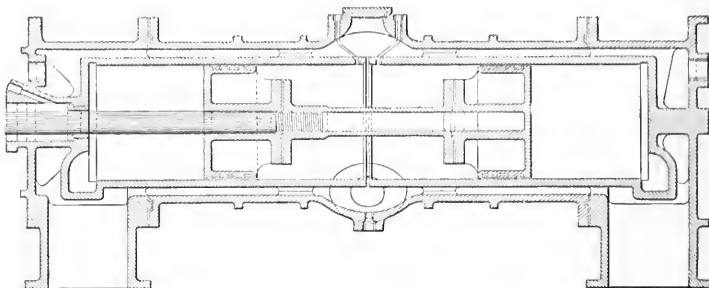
Section of High-pressure Cylinder showing Method of Admitting Steam between Piston Heads.
